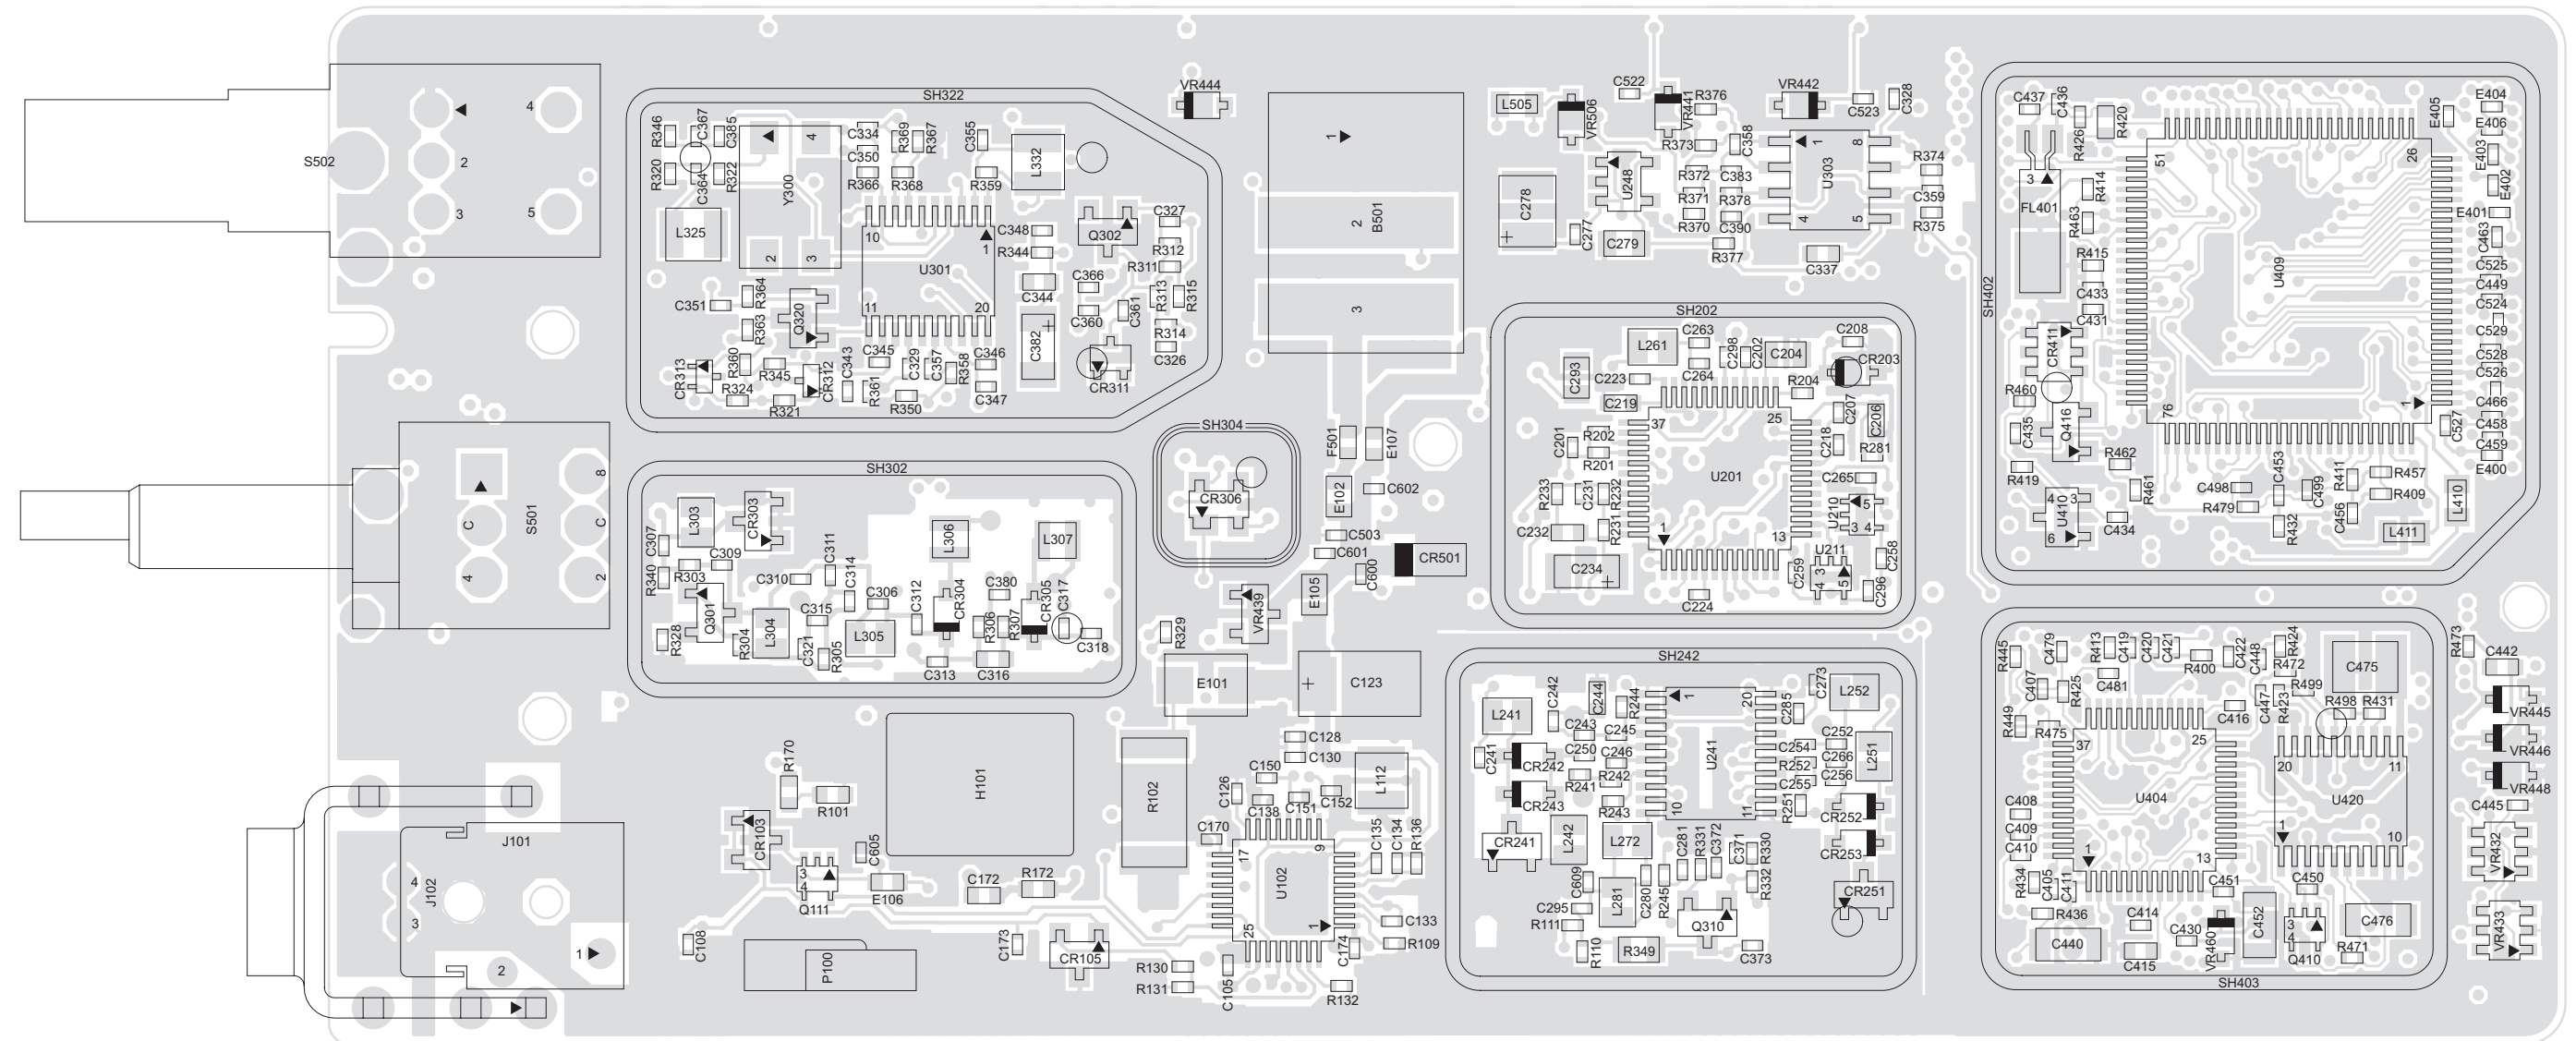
UHF Band 2 (450-527 MHz) Main Board Bottom Side: PCB No. 8415235H07
